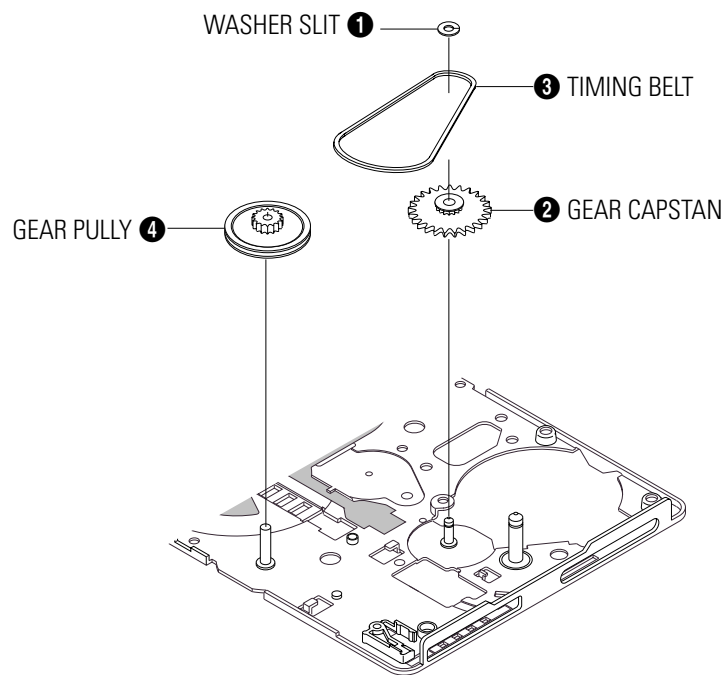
Gear Pully, Timing Belt, Gear Capstan
